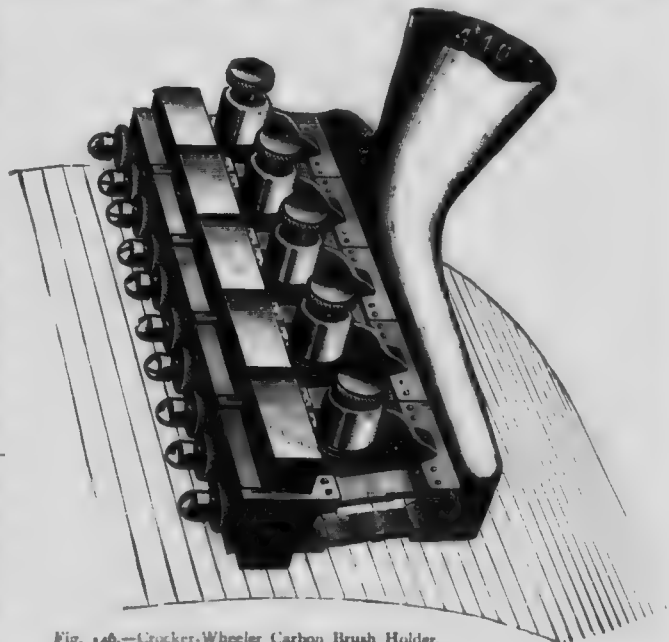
Crocker-Wheeler Carbon Brush Holder.
